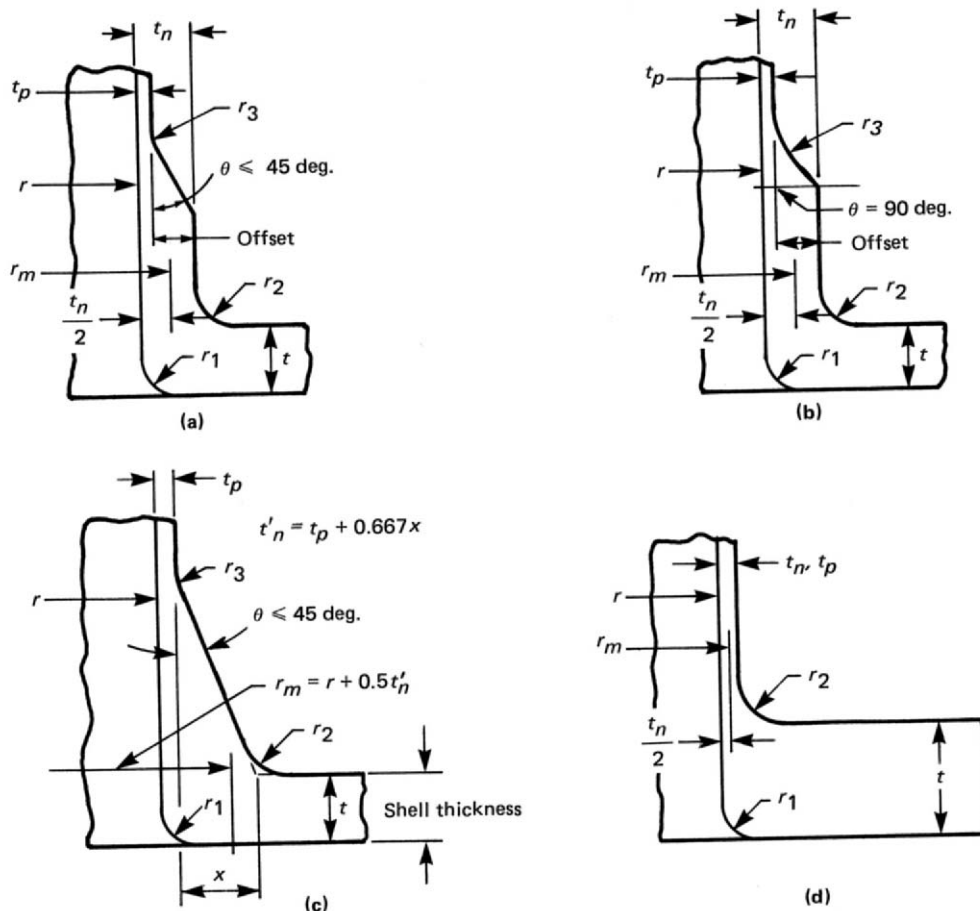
NOZZLE NOMENCLATURE AND DIMENSIONS
